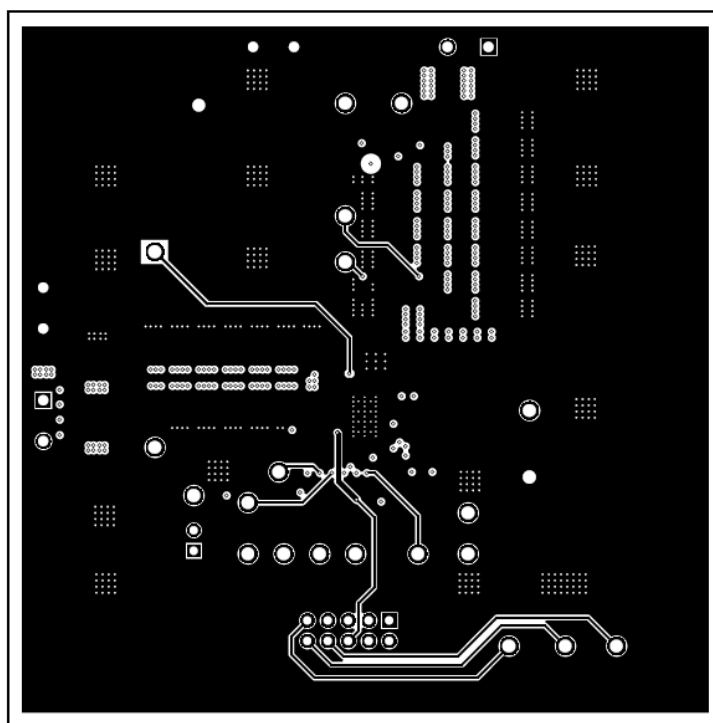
PWR-784EVM Inner Layer 3 (Top View)
